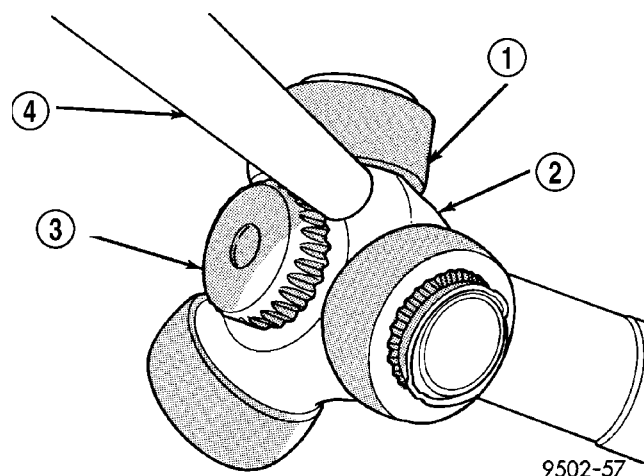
Spider Assembly Installation on Interconnecting Shaft
